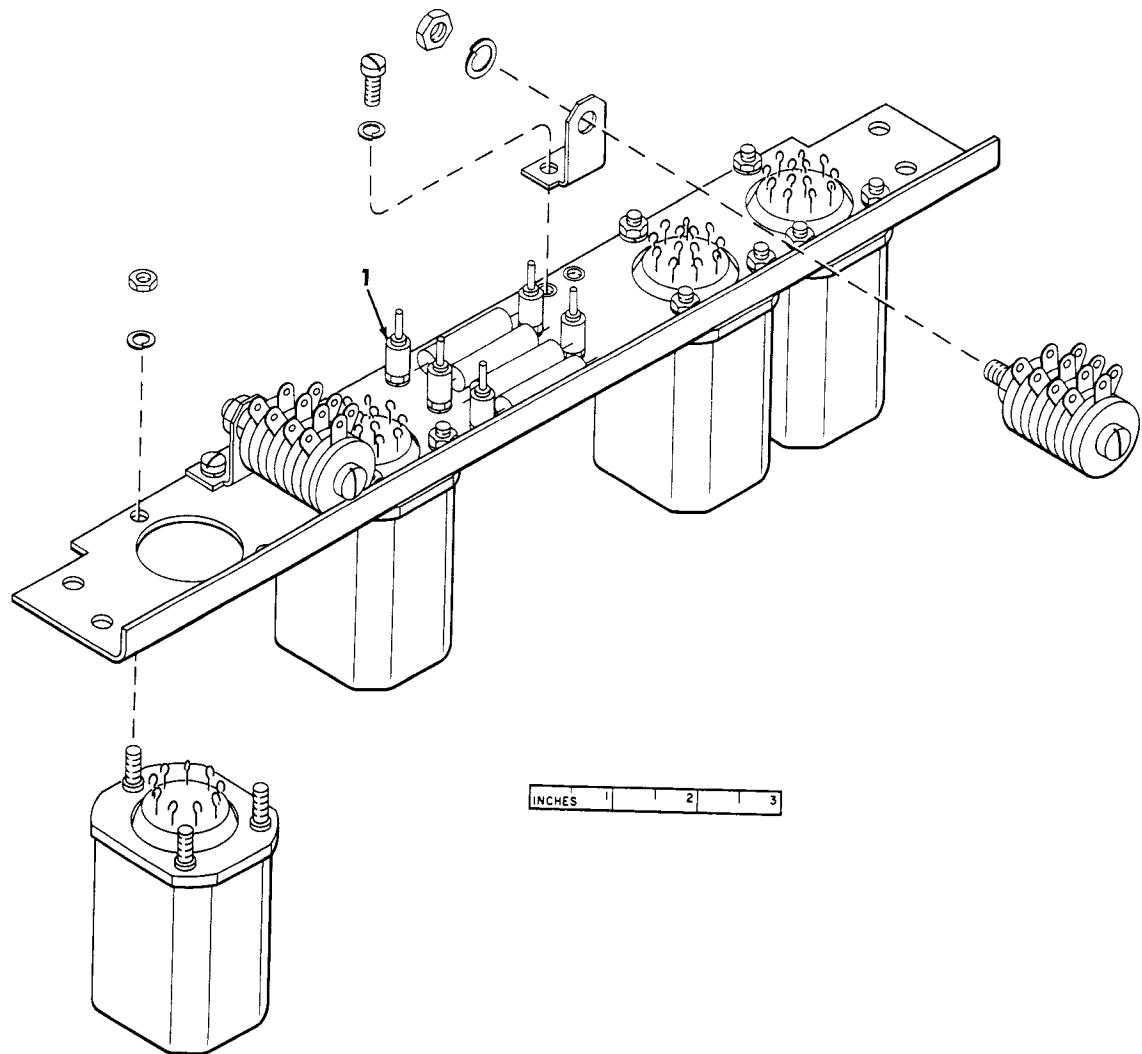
Amplifier, electronic control (9006949) – partial exploded view
